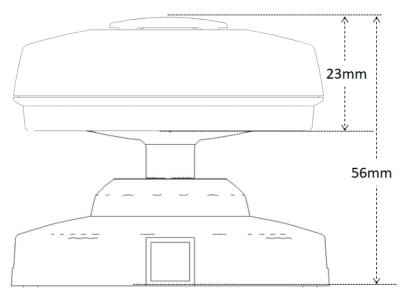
Modbus Gas and TrueVOC Sensor Dimension - Side View - Swivel Mount
